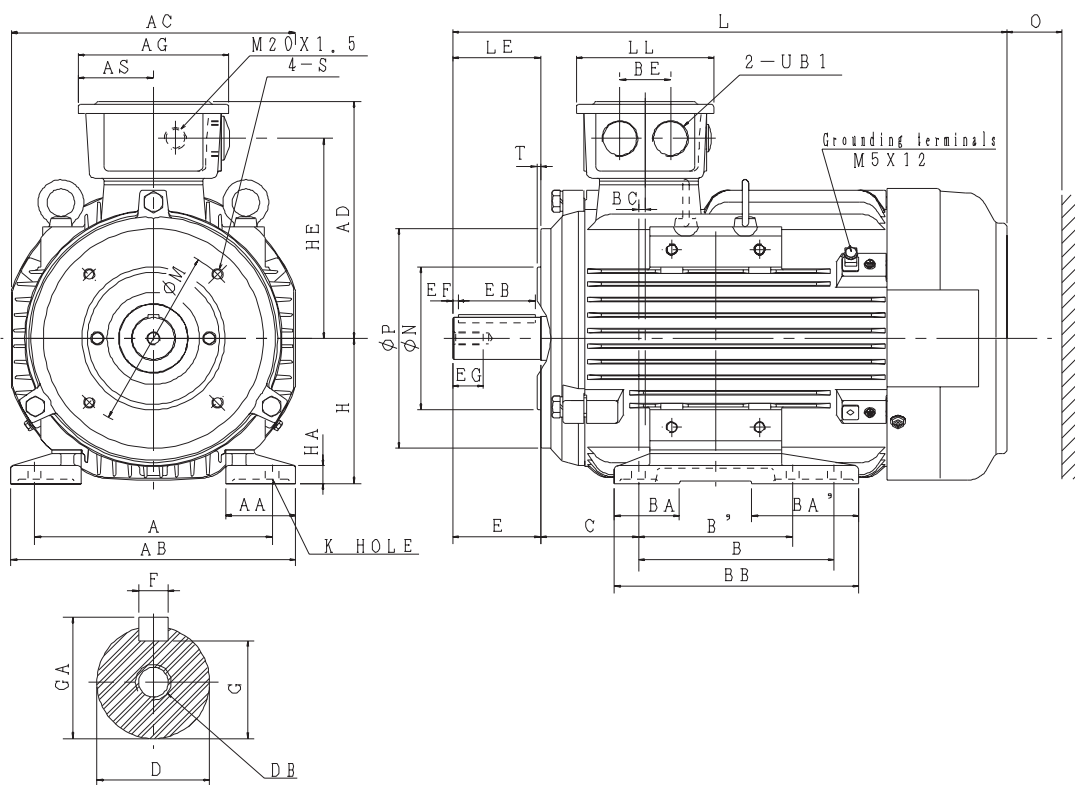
Outline drawing of cast iron design, feet version, mounting B34; frame size 132S - 160L
